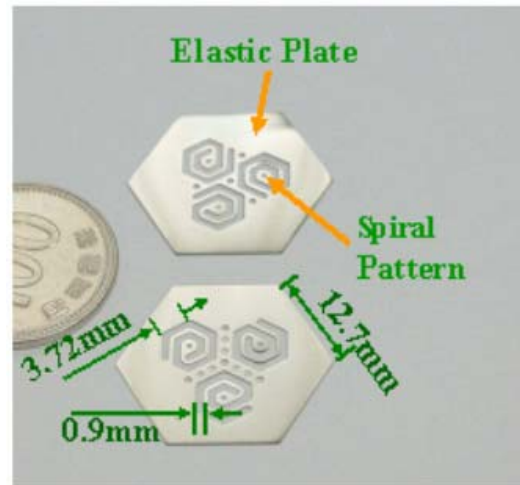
Design of New Actuating Module Elastic Plate with Spiral Patterns
